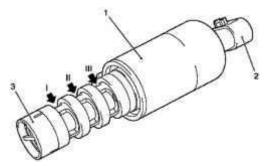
Electrohydraulic valve: 1 - body with an electromagnet, 2 - a connection through the wiring harness connector, 3 - cross section of the valve with a groove for connecting the annular grooves I and II and the center channel for connecting the annular grooves (III) to drain the oil
